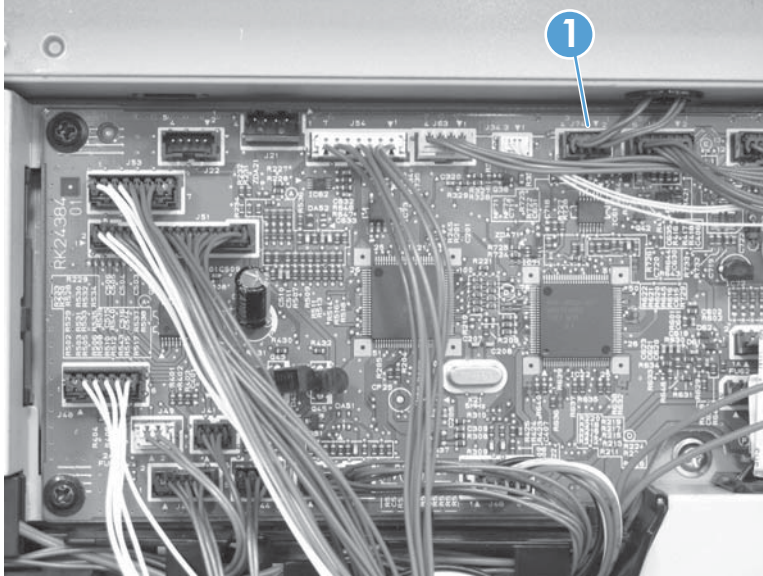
Remove the cartridge door interlock switch (4 of 4)
